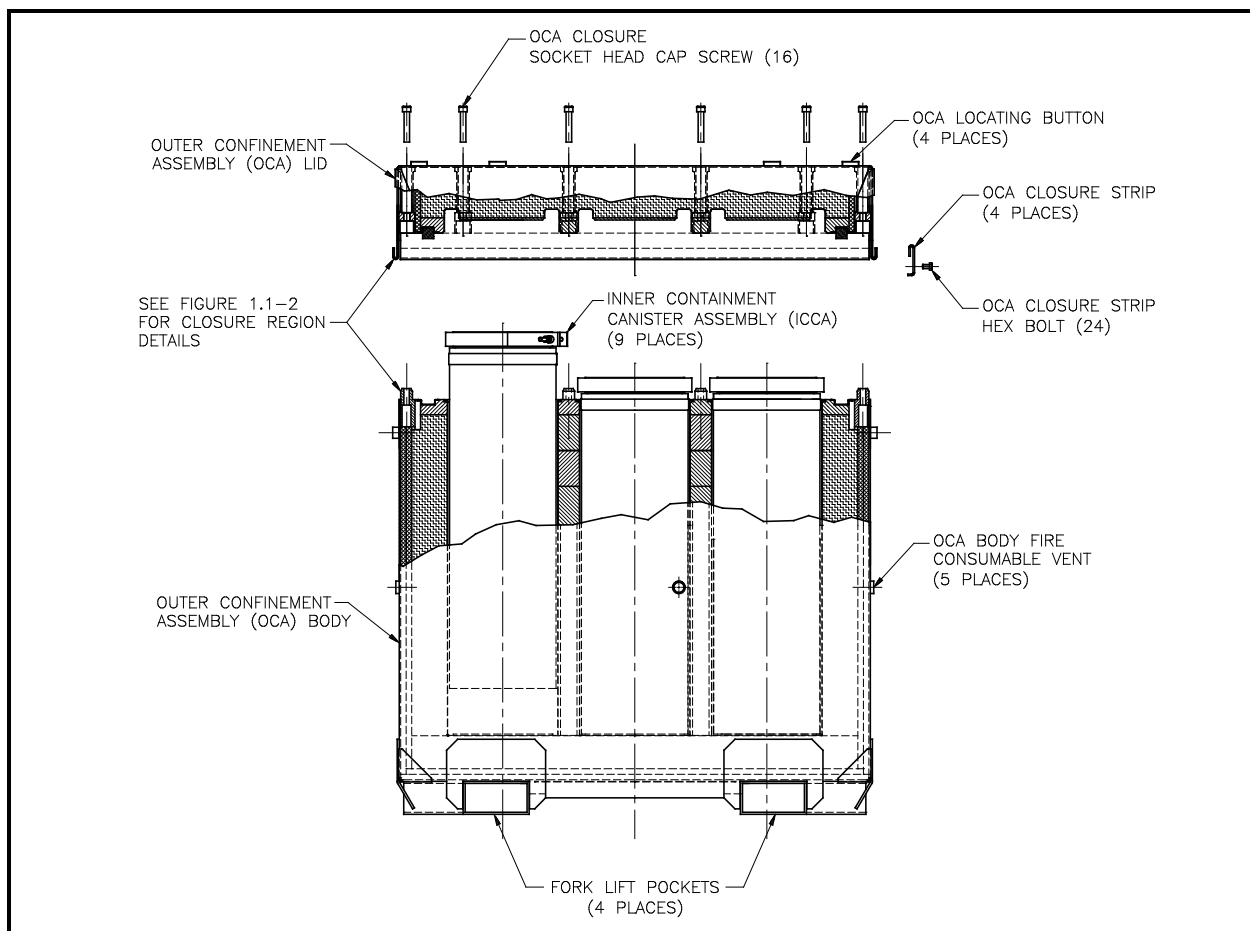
Sectional View of the GNF NPC Packaging
